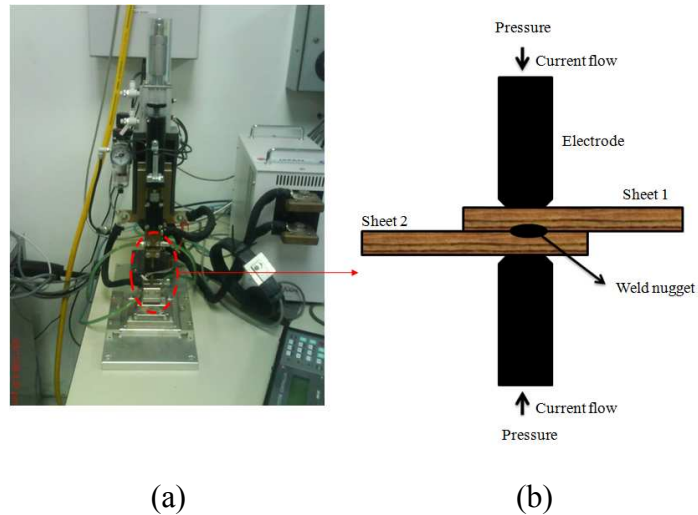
Schematic figures of (a) micro spot welder machines and (b) the spot weld illustration
